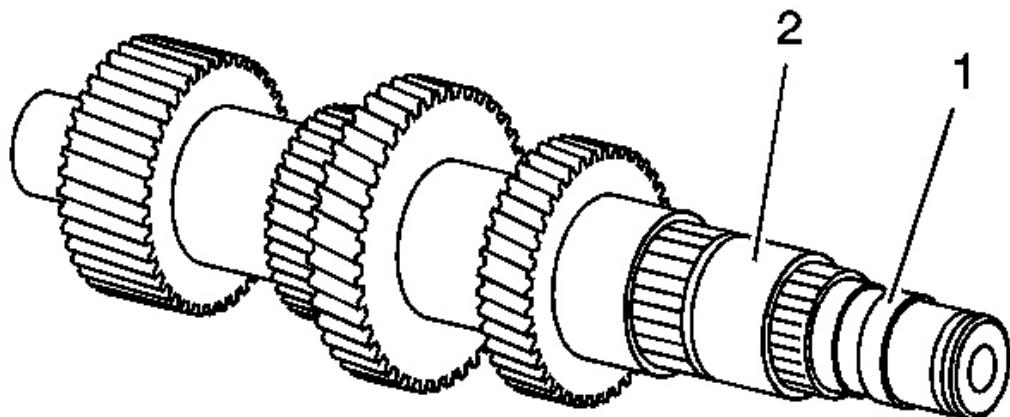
Inspecting Rear Bearing Race On Countershaft
